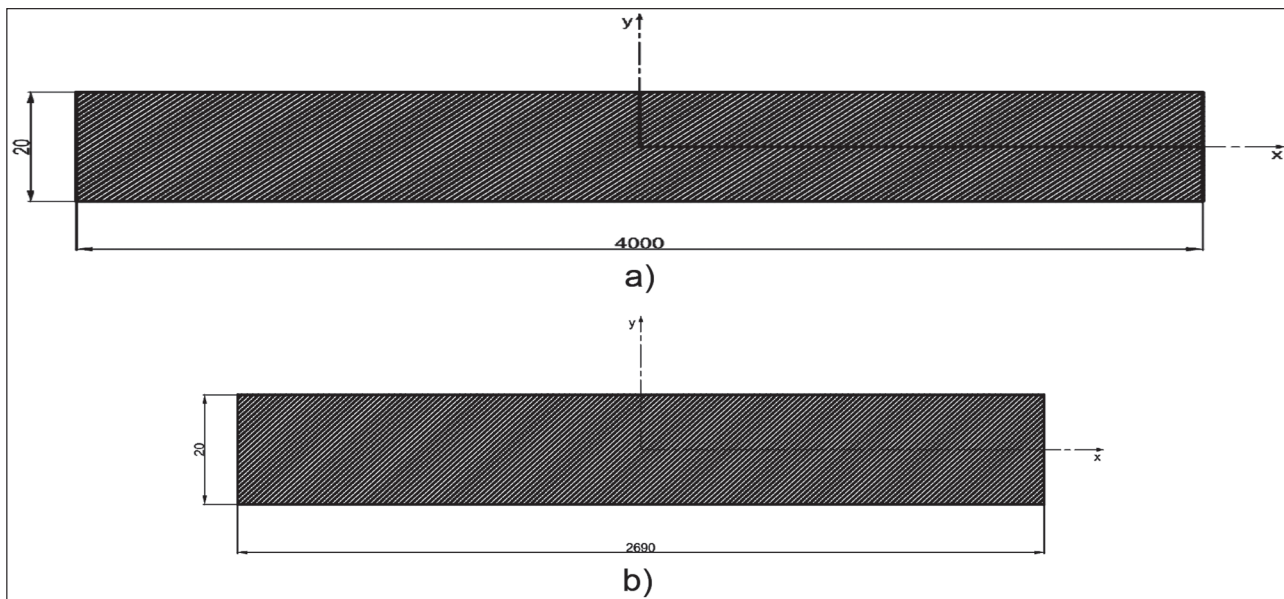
a) Hydraulic Excavator bucket floor cross section Profile
